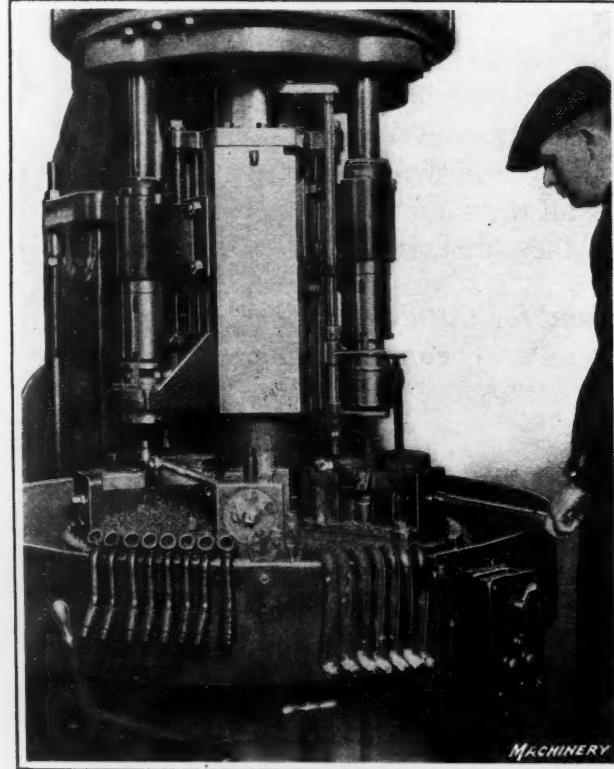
Close-up View of the Daniels Vertical Automatic Chucking Machine showing more clearly the Arrangement of the Tools and Fixtures
